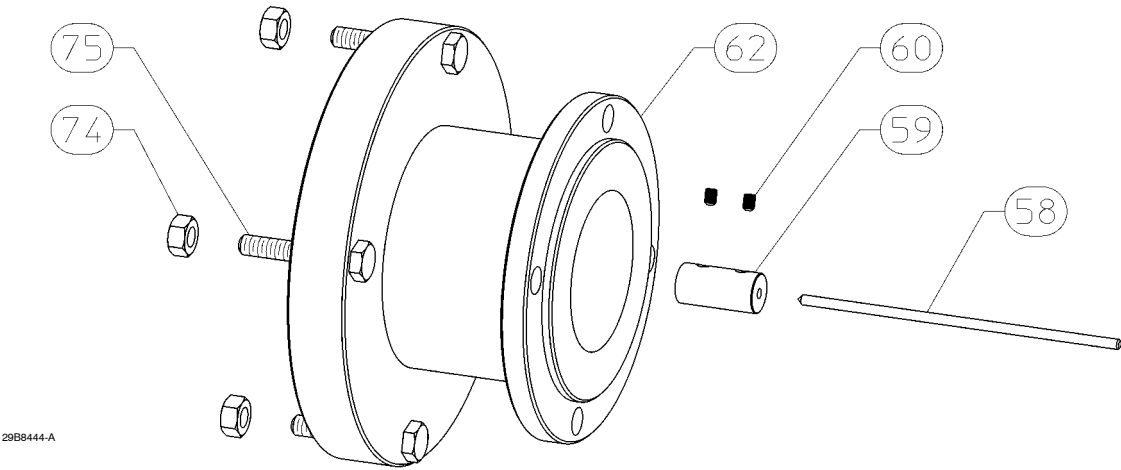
Mounting Kit for Masoneilan® 12200 and 12300 Sensor without Heat Insulator
